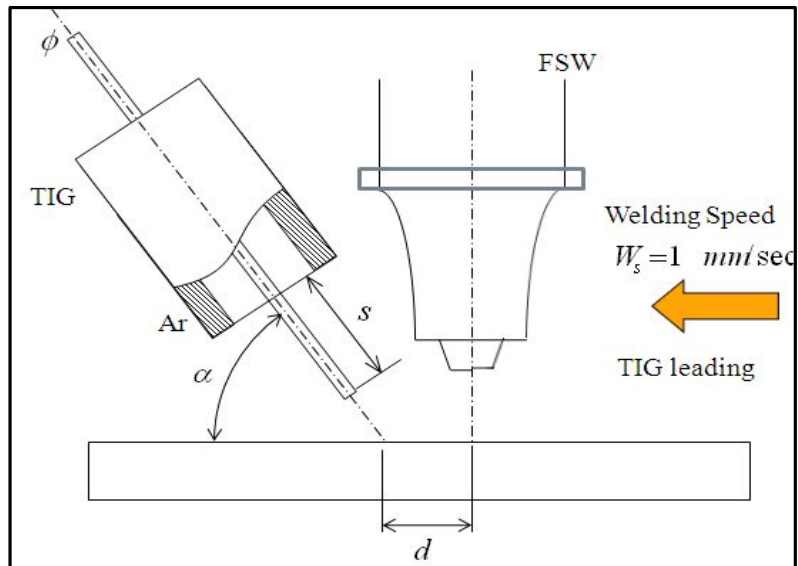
Schematic of TIG assisted FSW welding process
